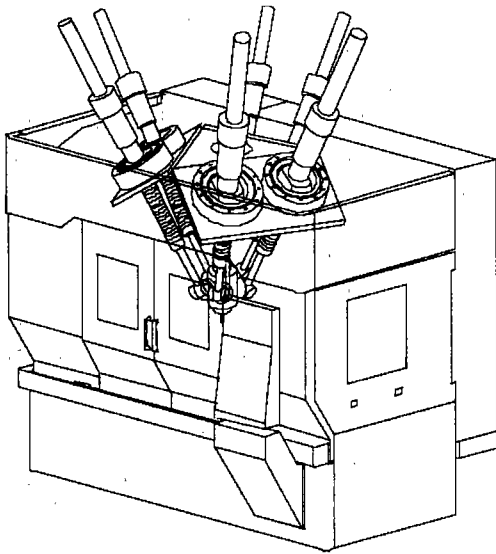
A Hexapod-type parallel mechanism machine tool, COSMO CENTER PM600 by Okuma Corp.
